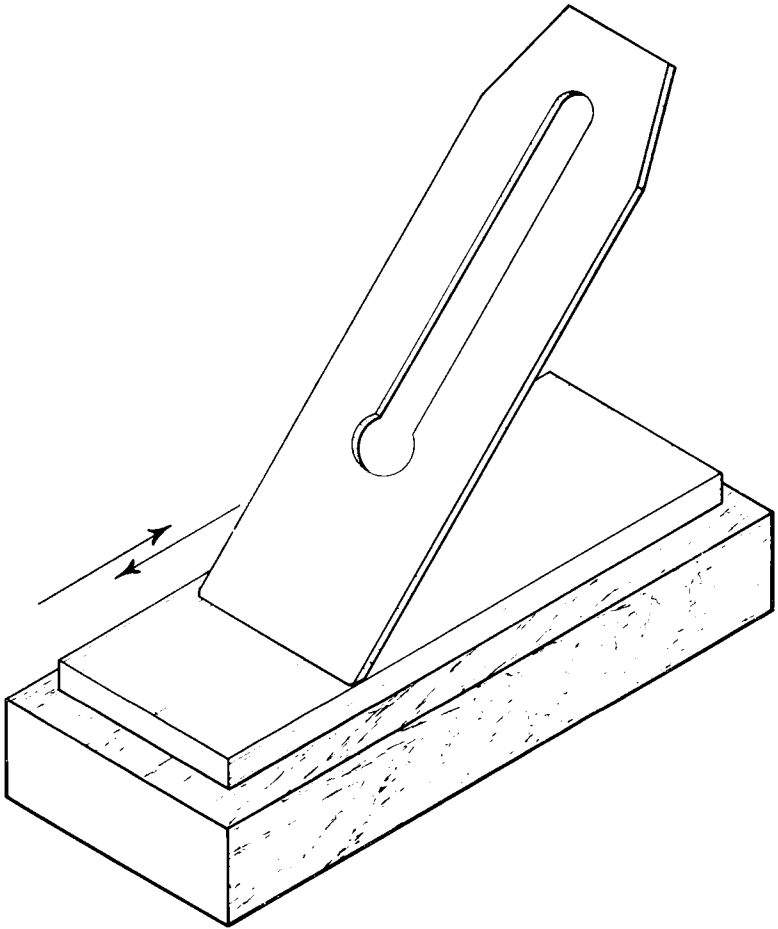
Honing the chisel or plane blade after grinding to give a finished cutting edge.
